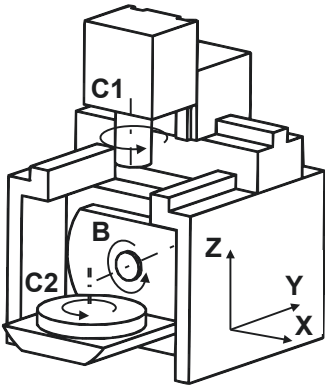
Schematic of the 5-axis machine tool under investigation, adapted from [16]
